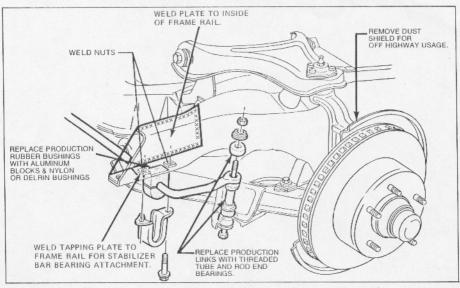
Weld tapping plate to inside of frame rail for stabilizer bar bearing attachments.
